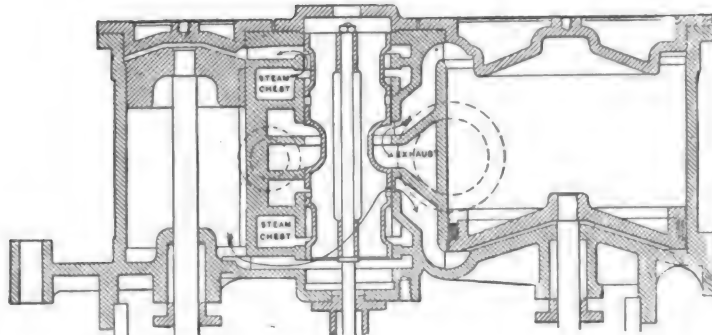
SINGLE VALVE CONTROLLING COMPOUND ENGINE.
